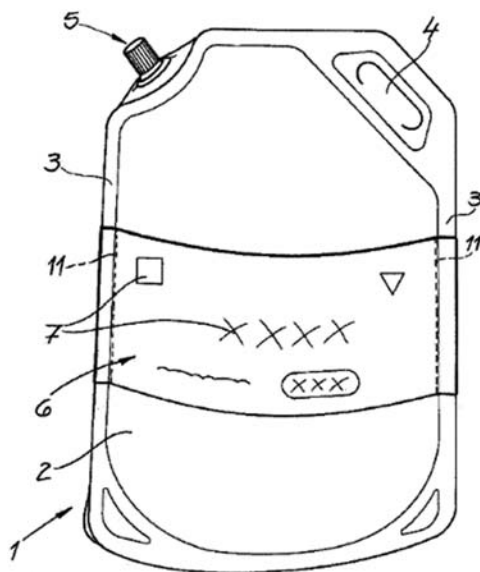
Front view of a pouch having a body made from a monocomponent film and a separate piece of label film (2017, EP3168169 A1, MONDI CONSUMER PACKAGING TECH GMBH; WERNER & MERTZ GMBH). 1, Pouch body; 2, Face panel; 3, Longitudinal welds; 4, Stamped-out handle; 5, Reclosable spout; 6, Label film; 7, Printing; and 11, Tear lines.
